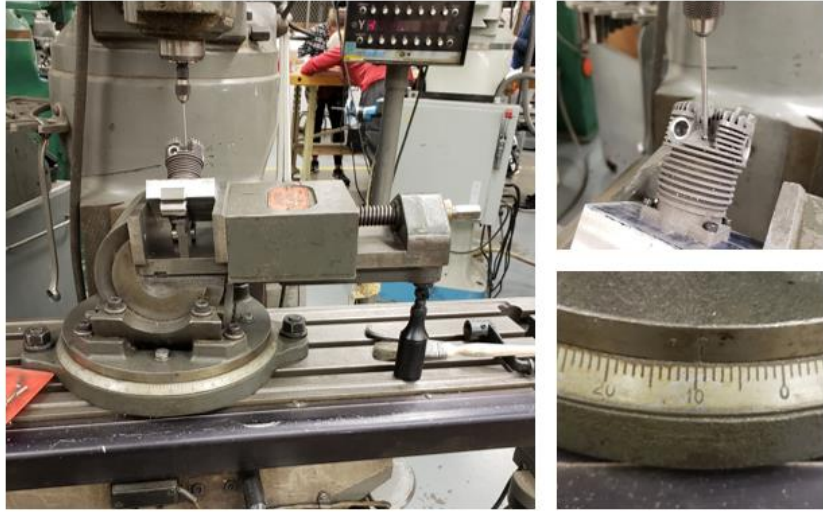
Setup for drilling sparkplug hole, using a sine block, angle vice, machinist jack, and probe
